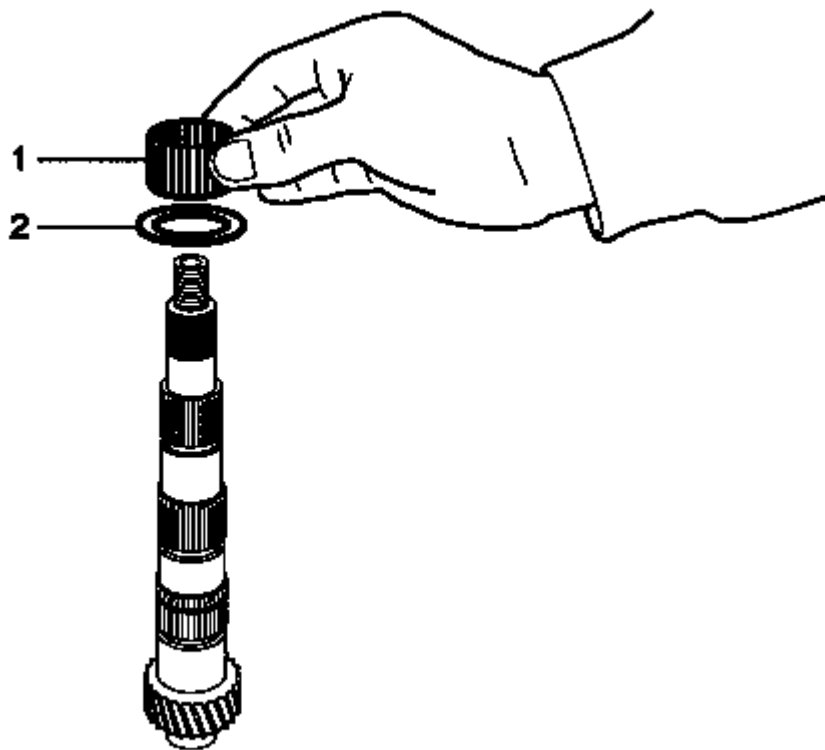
Counter Shaft 1st Gear Bearing And 1st Gear Spacer
